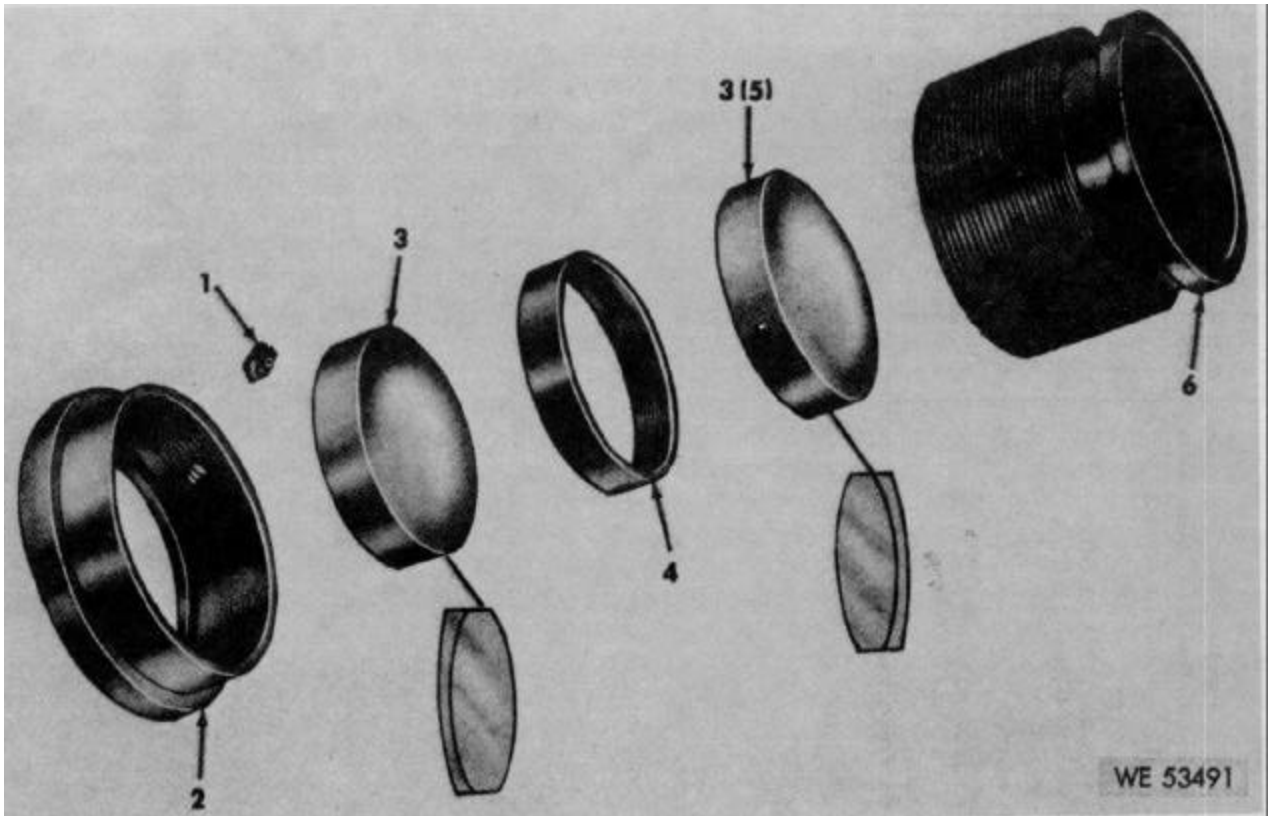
Eyepiece Assembly (7649238) -exploded view.
